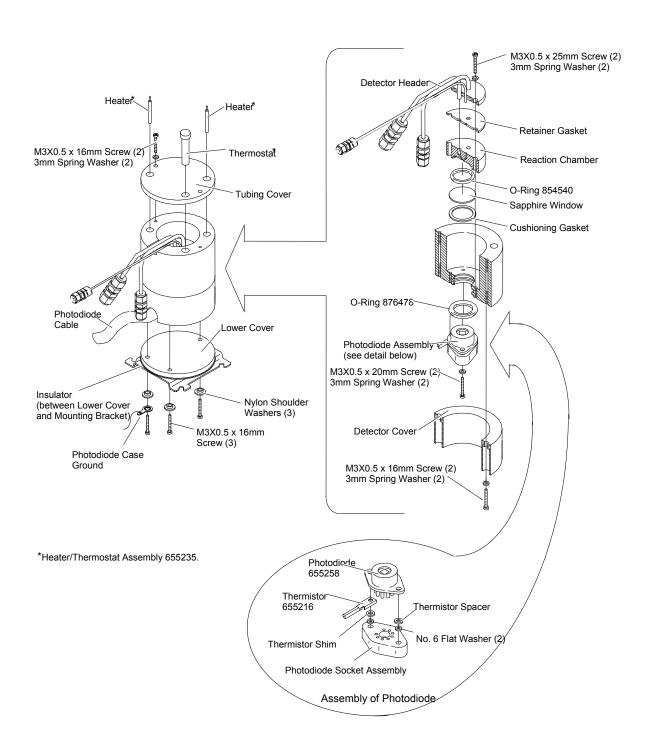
Chemiluminescense Detector Assembly - Exploded View
